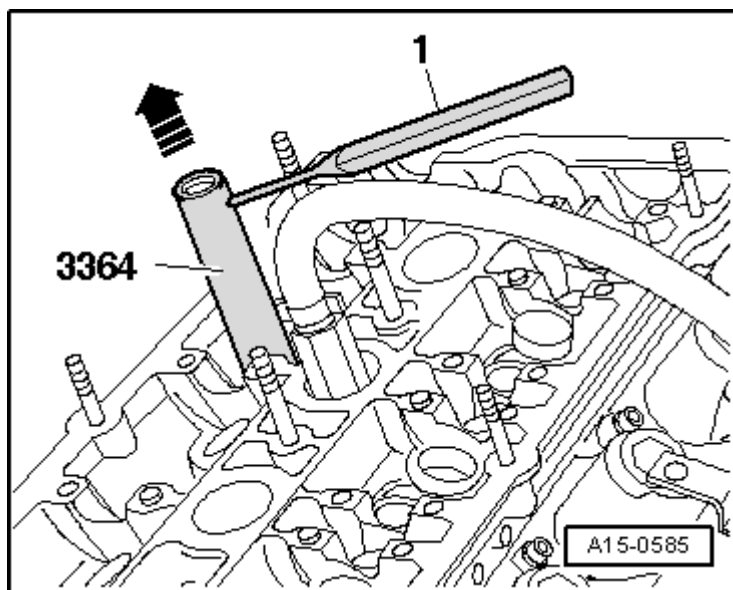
Identifying Placement Of Lower Part Of Valve Seal Removal Tool 3364 On To Valve Stem Oil Seal
